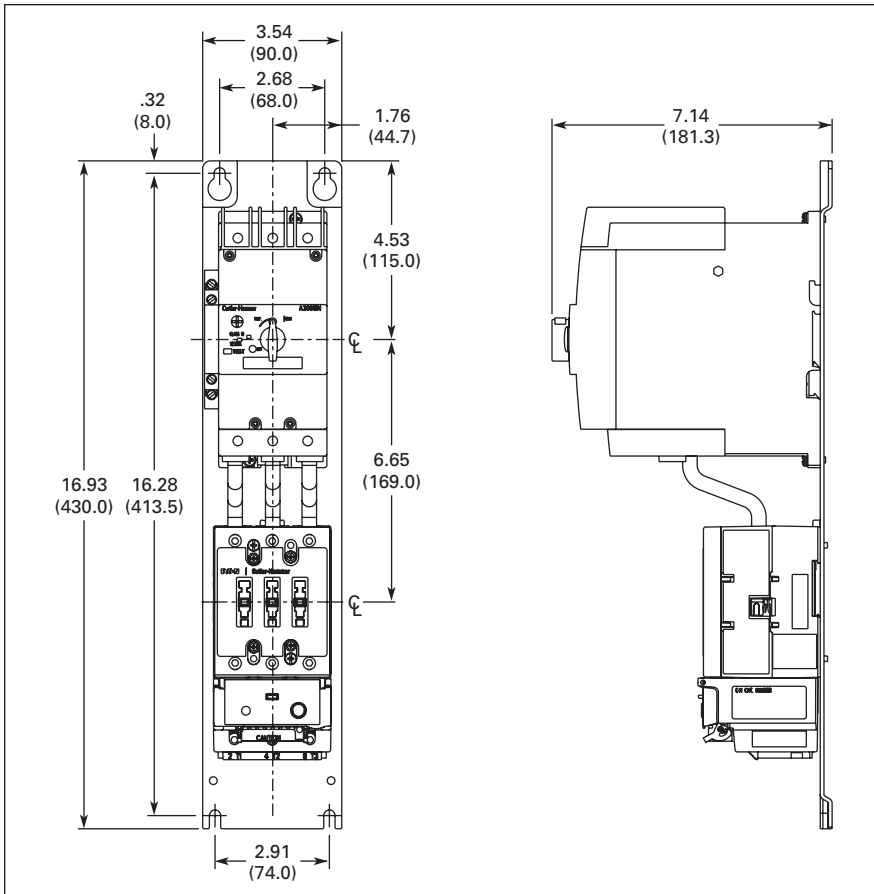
Non-reversing Manual and Combination Motor Controller (M)N307 (A307 MMP + C320WC45IT WCL + N111B [Size 00/0] Contactor) — Approximate Dimensions in Inches (mm)
